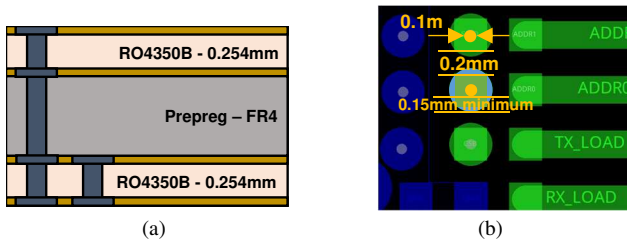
(a) Demonstration PCB stackup (b) Pin Via Constraint.
